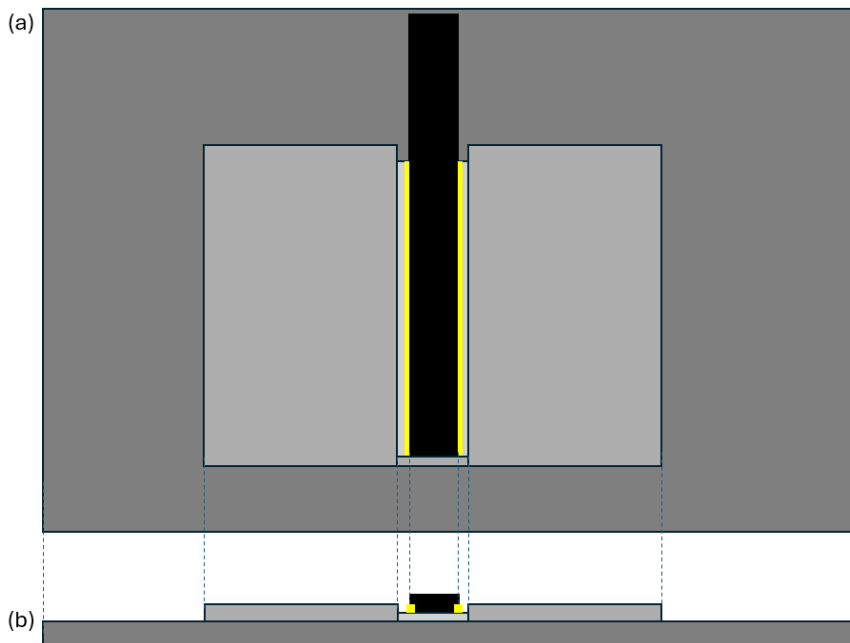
(a) Bird's-eye view and (b) front view diagram of the fixture used for water jetting. Samples composed by a plate (in light gray) bonded to a gasket (in black) using an adhesive (in yellow) are secured by a metal fixture (in dark gray) while is being sprayed during the water jetting cleaning.
